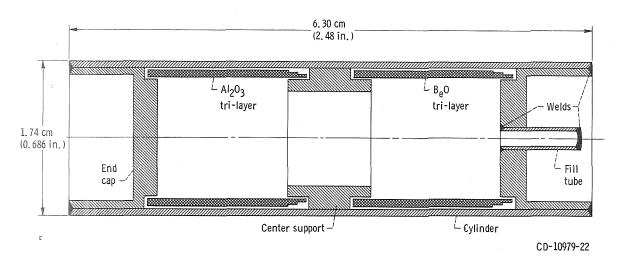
Tri-layer - canister assembly. (All canister parts of AISI 347 stainless steel.)
